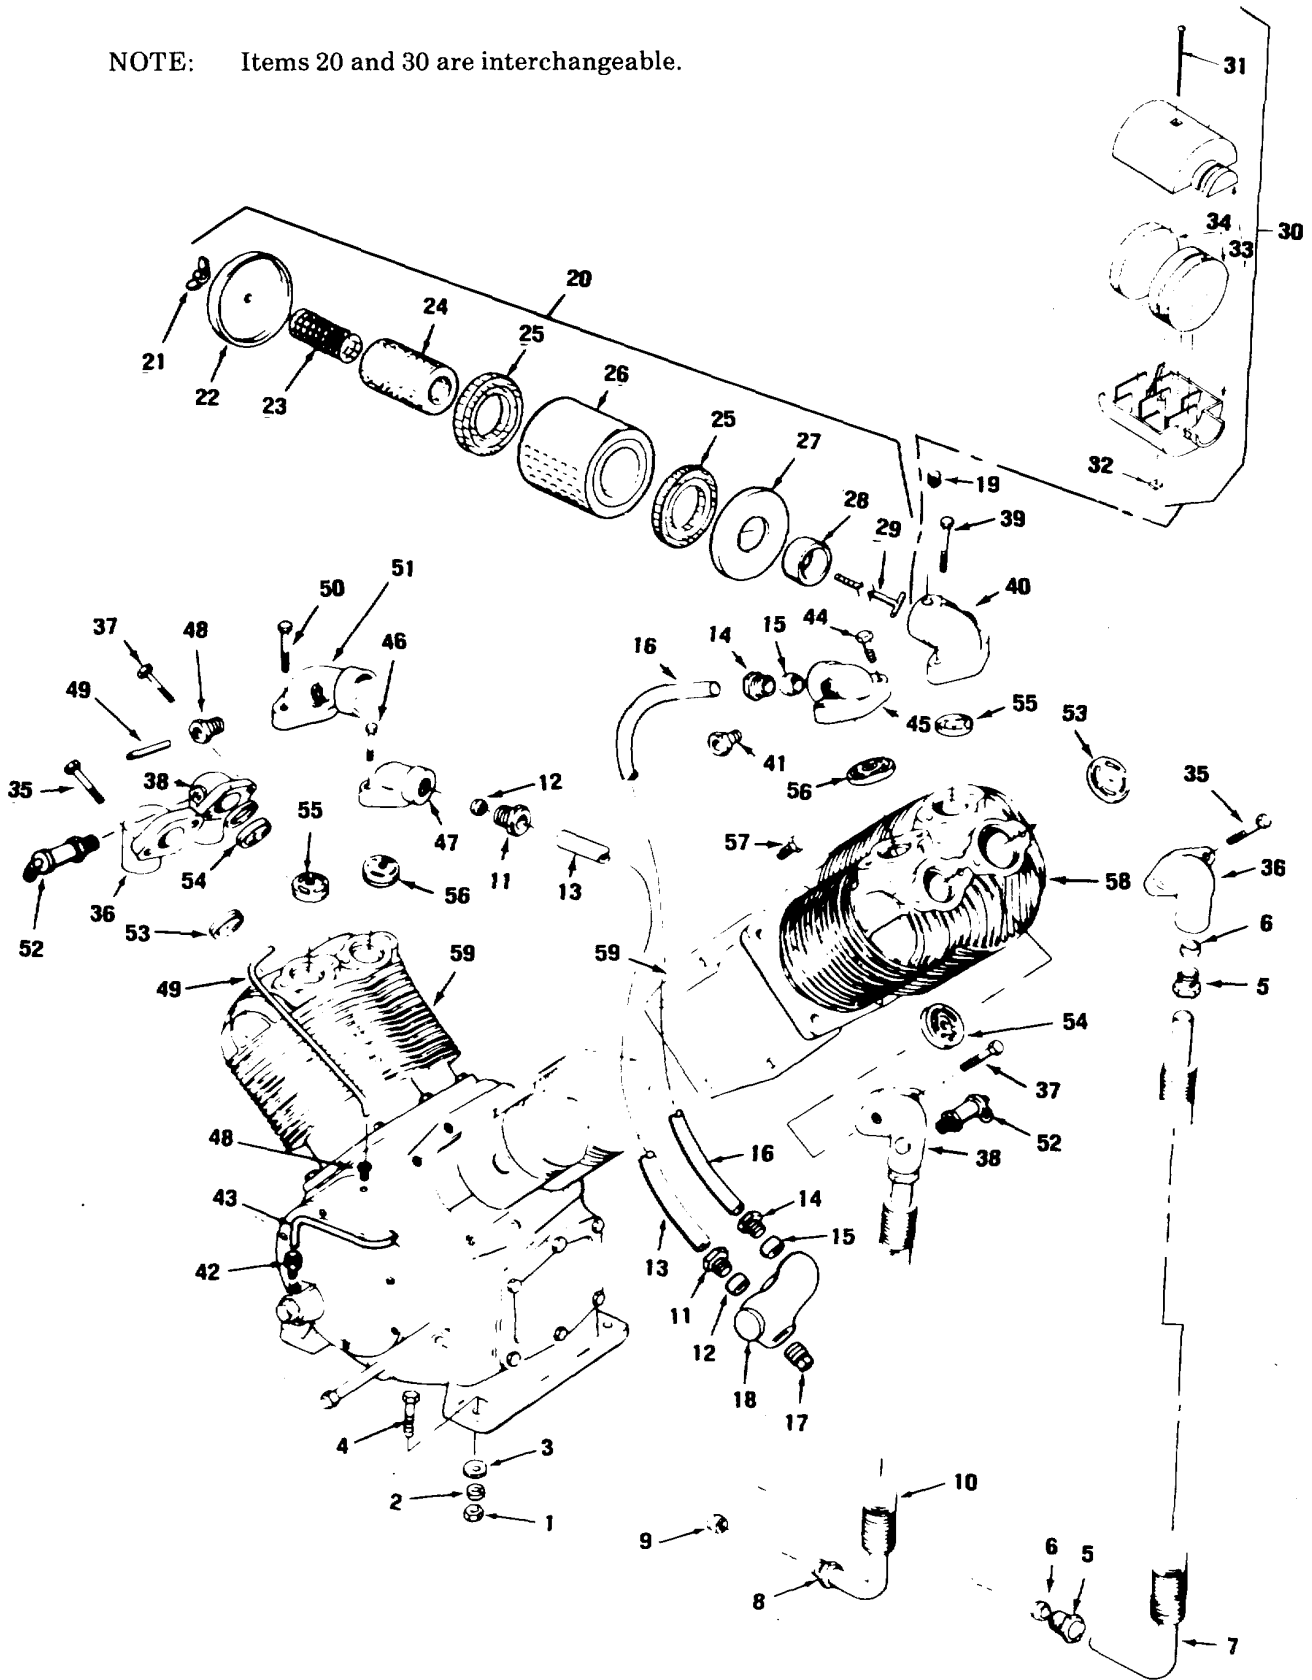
Air compressor assembly, cylinders, manifolds and related components, exploded view
